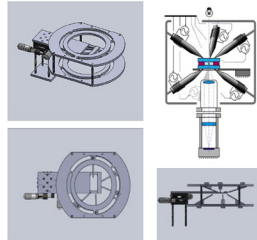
Final CAD illustration of mechanical mounting assembly to microscope [2]
